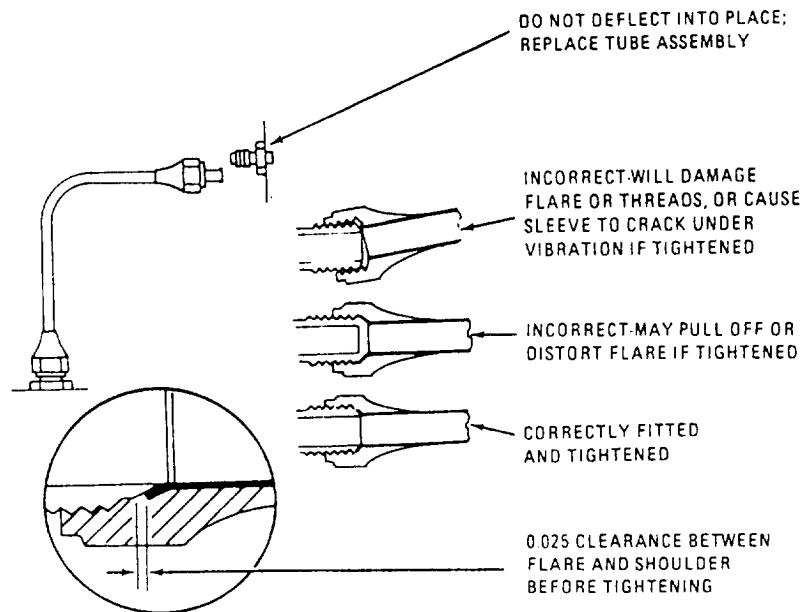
Correct and incorrect methods of installing flared fittings.
